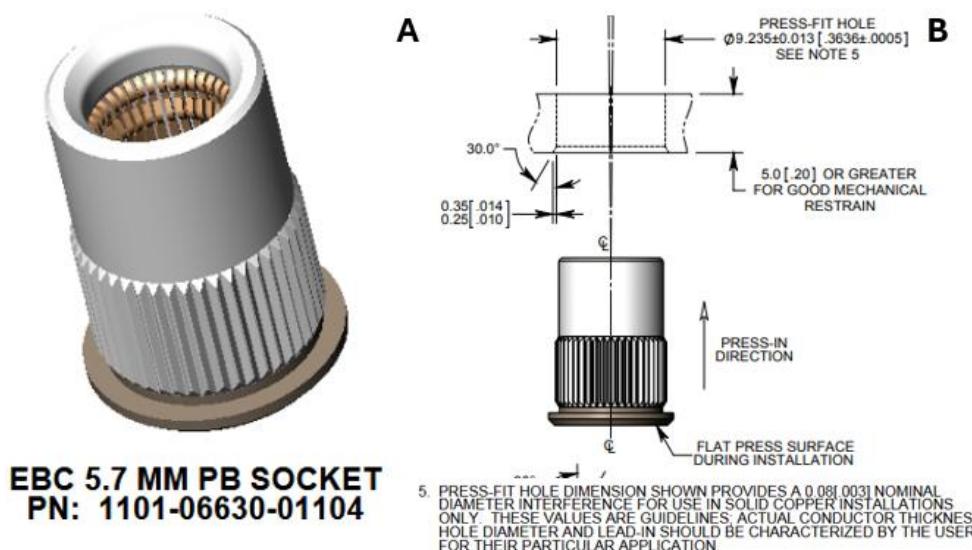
EBC Connector (A). Press-Fit Hole Tolerance for an EBC (B)
